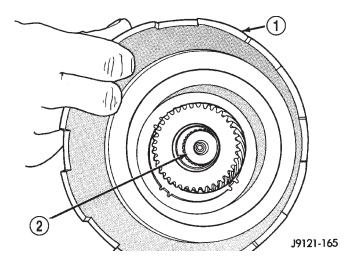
Installing Assembled Sun Gear And Driving Shell On Output Shaft
